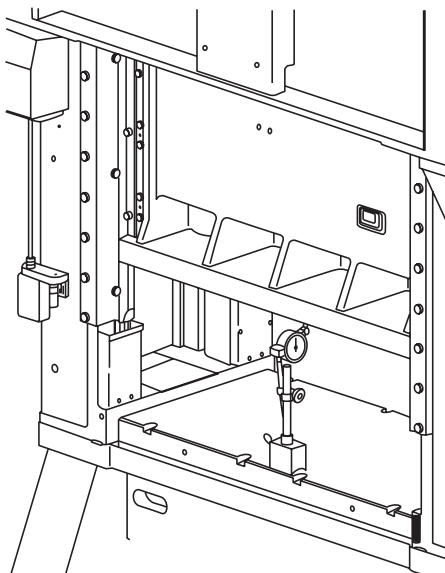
Checking Parallelism From Slide Face to Bed or Bolster Surface
